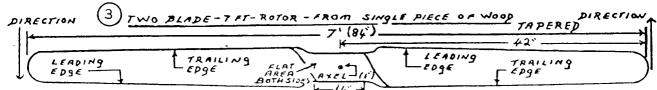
Shows the same two blade, single piece rotor construction as in plate no. 42 and 43, except that
